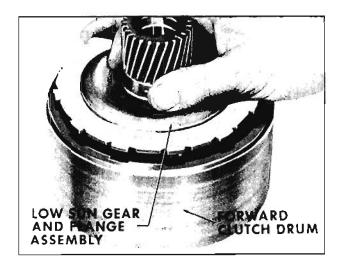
Removing Low Sun Gear and Flonge Assembly
